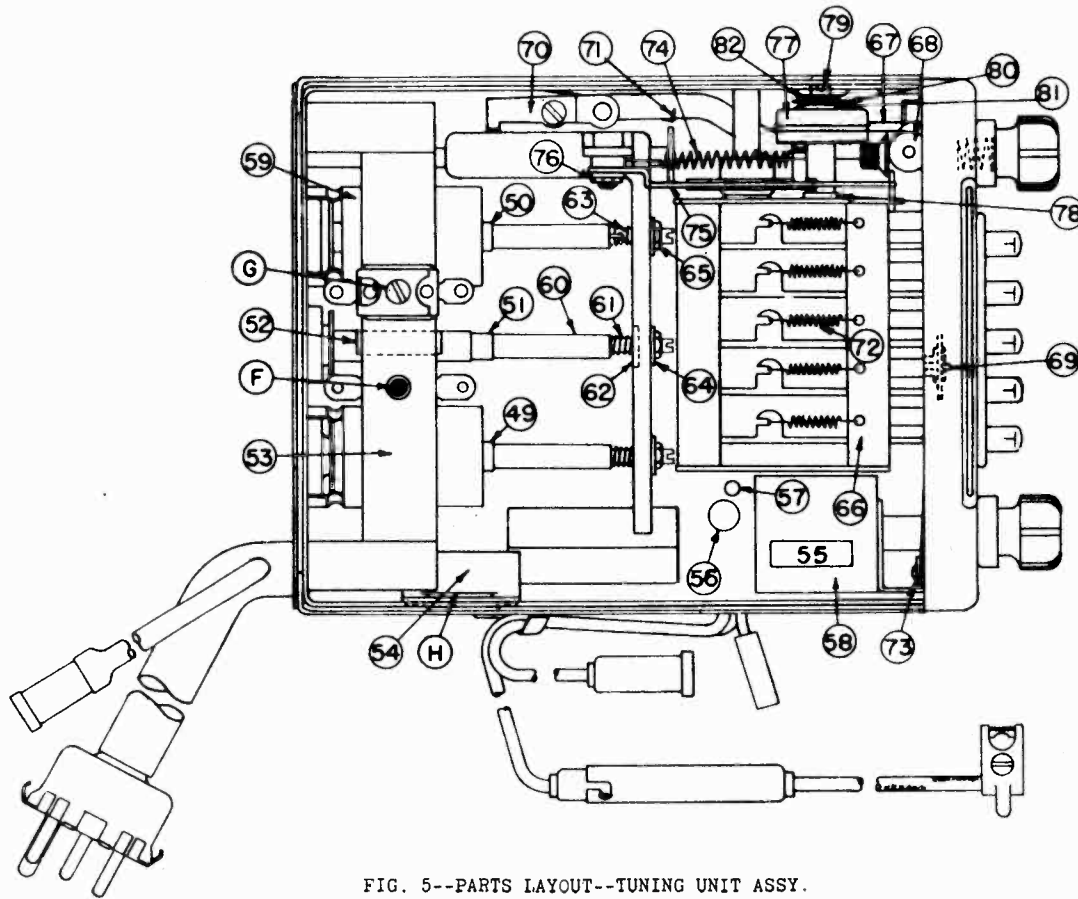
PARTS LAYOUT--TUNING UNIT ASSY.
